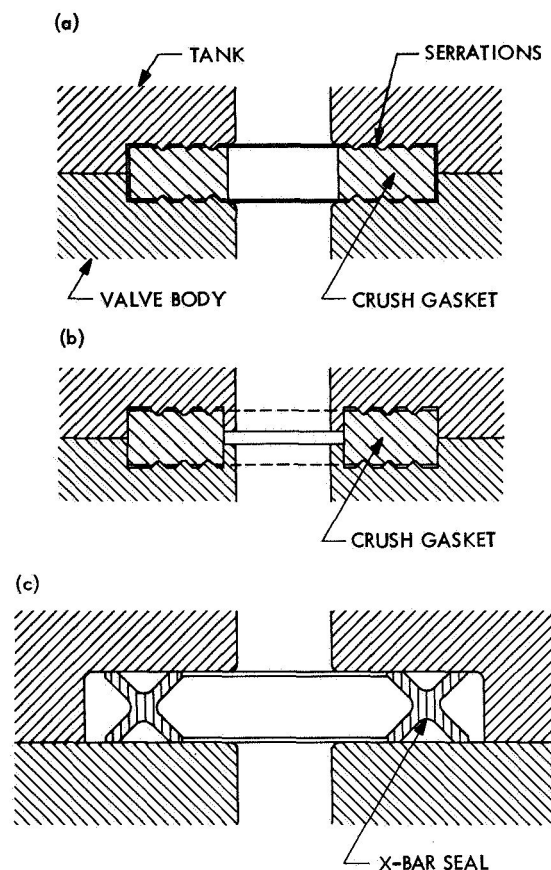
Cross section of high-pressure seals: (a) present design, (b) machined pocket design, (c) X-bar design
